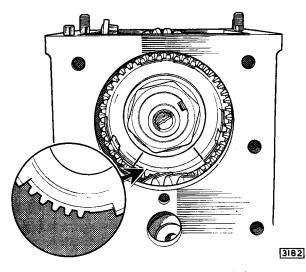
Rotate the mainshaft until one of the cutaway portions in 3rd/Top synchro hub is in line with the countershaft.
